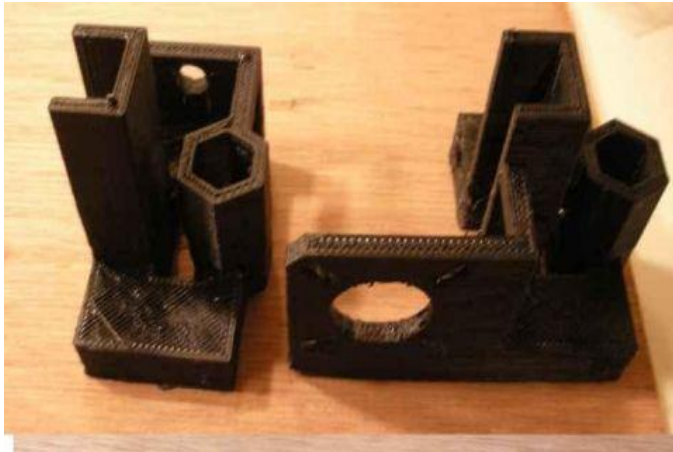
X-end idler part on LHS and X-end motor part on RHS
